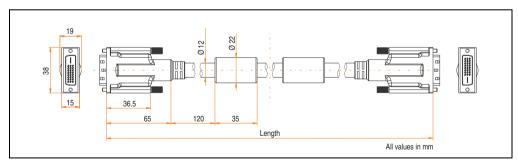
Dimensions - SDL cable 5CASDL.0xxx-03
